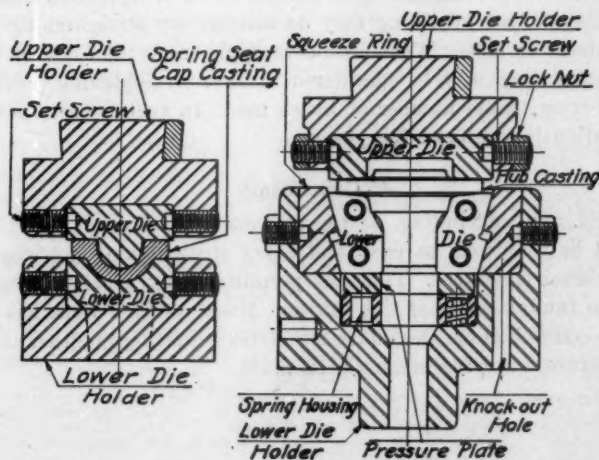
LEFT—SPRING SEAT CAP HAMMER DIE. FIG. 18—RIGHT—HUB HAMMER DIE.
